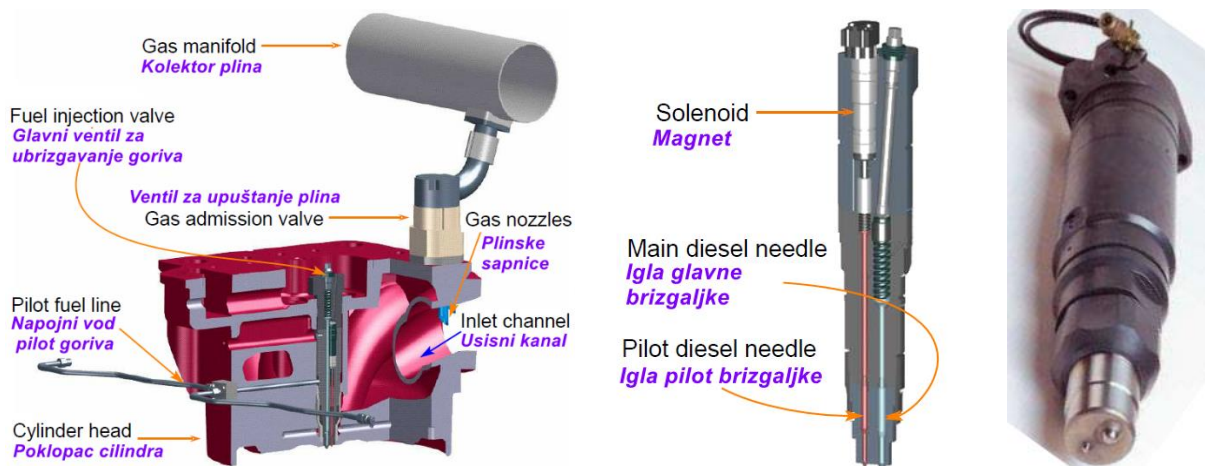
Cylinder head arrangement of DF 4T engine with diesel fuel injector and gas admission valve [8]
